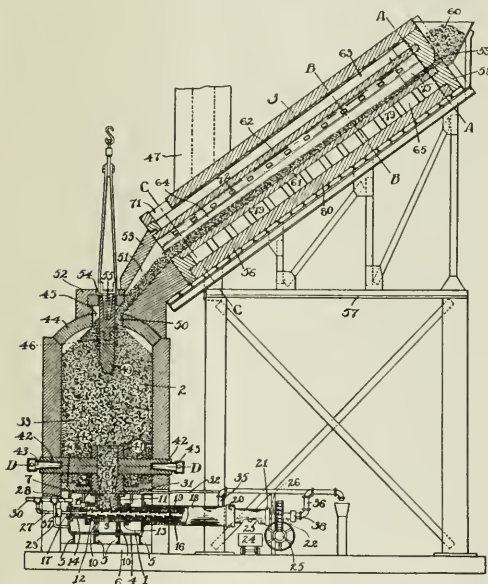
CROSS-SECTION OF CALCINING FURNACE
